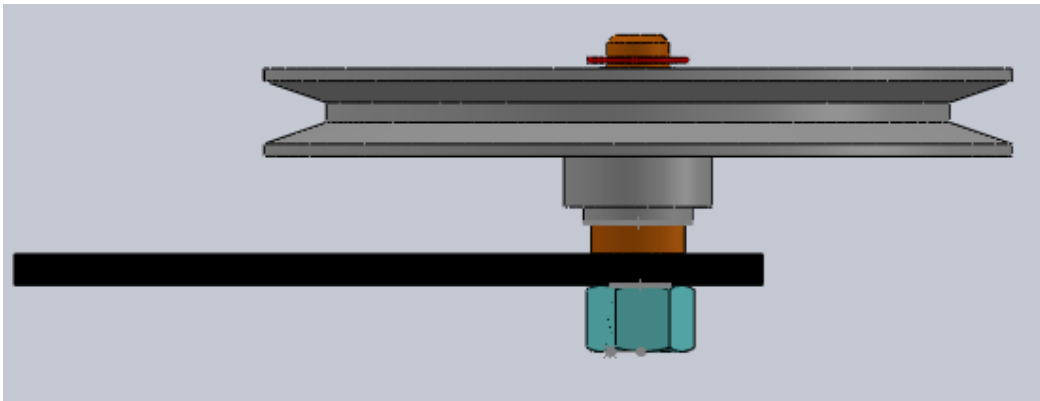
Shows the new idle pulley shaft mounted to the base with the pulley attached.
